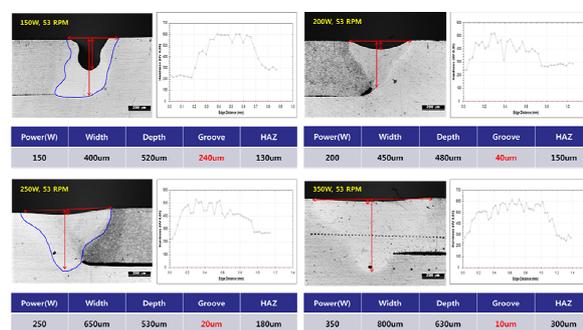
Effects of welding condition on Vickers hardness on HT9 end cap weld & HAZ.
